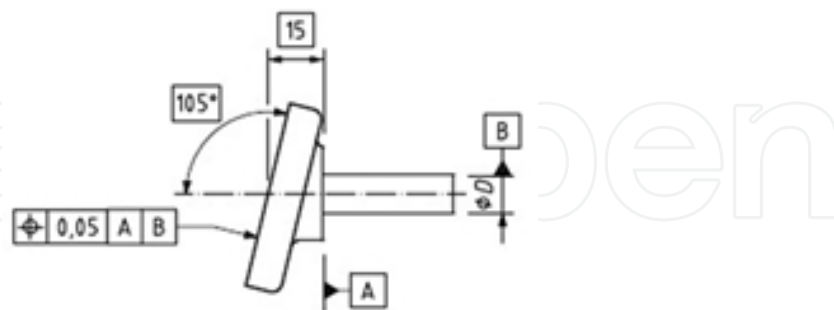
Position tolerance of a flat surface or a median plane.
